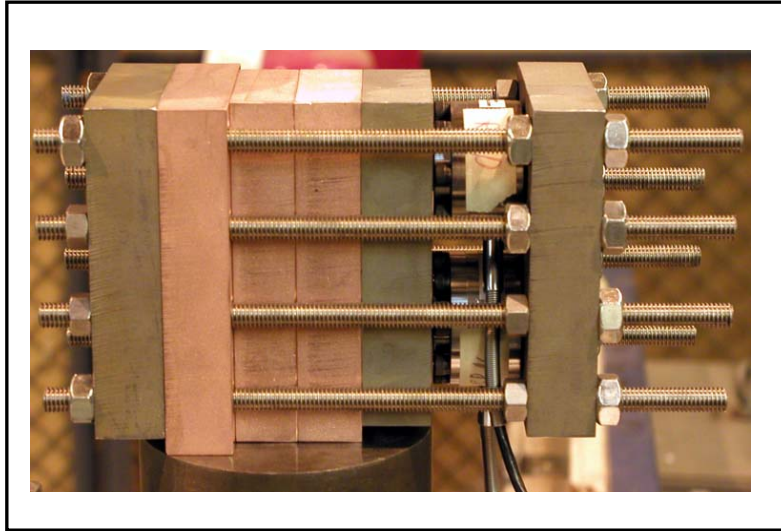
3/8-16 Tap-Lok Insert/ C10700 Copper Thread Pull-Out Test
